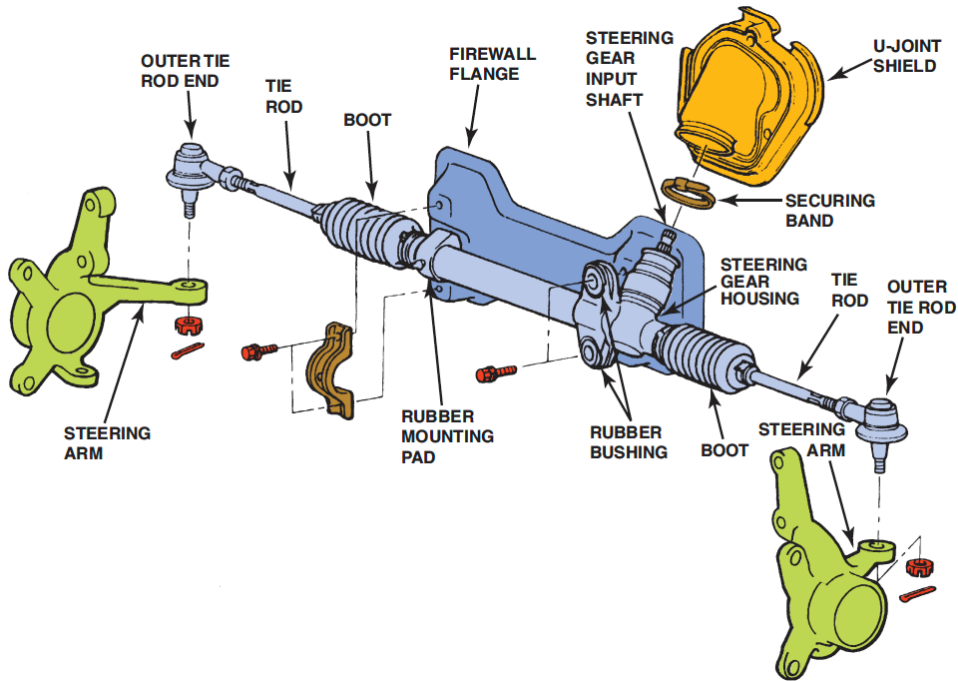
Bulkhead-mounted rack and pinion steering gear.
